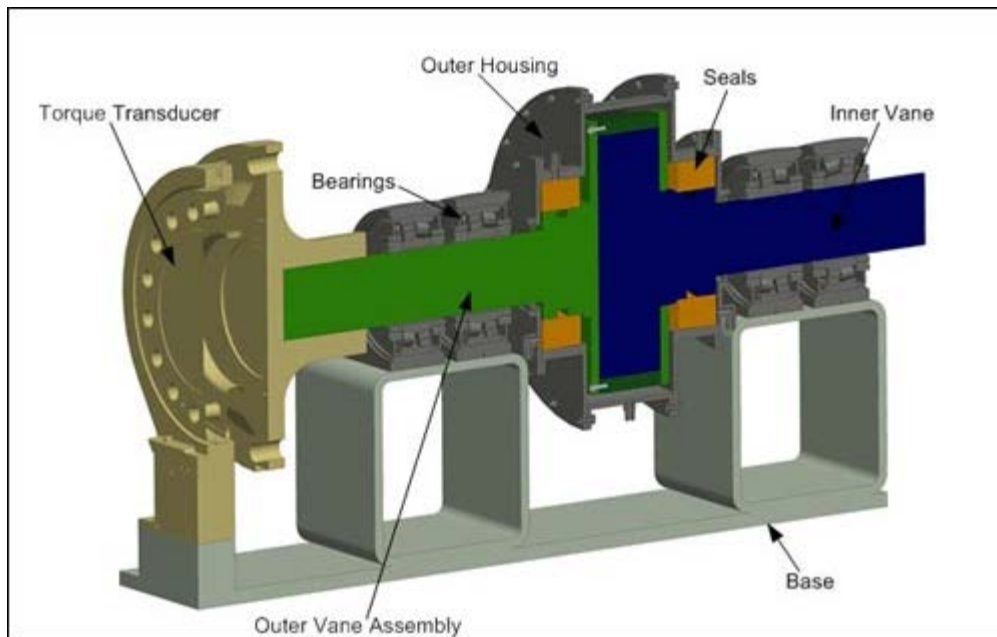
Overall assembly of the mechanism showing the location of seals, housings, bearings, and torque transducer all mounted on a common base structure.
